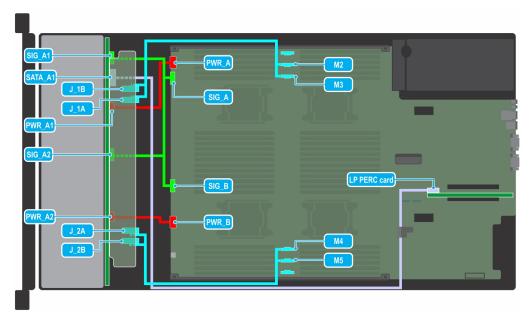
Cable routing - 24 x 2.5 inch, (16 NVMe + 8 universal) drive backplane
